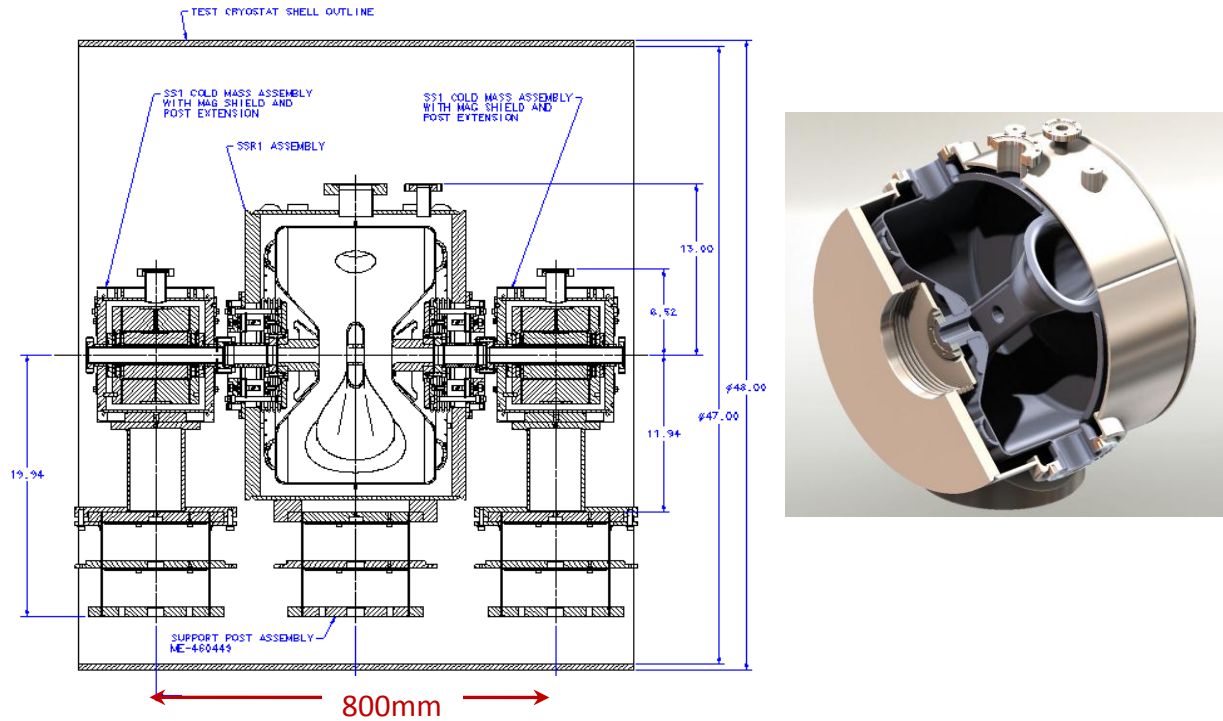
SSR1 cavity mechanical design and cutaway view.
